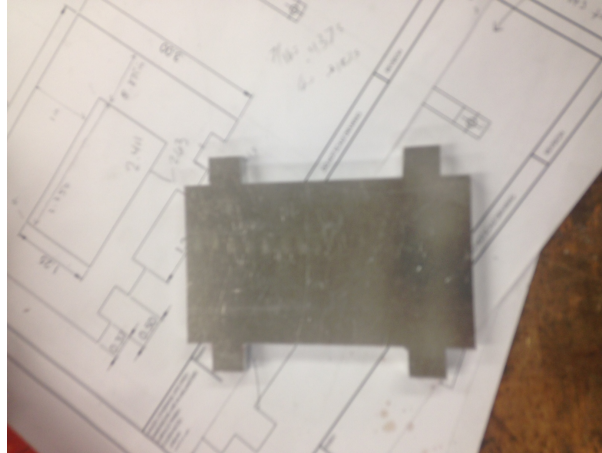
Photo of an unfinished aluminum part, the base plate of our gripper.
